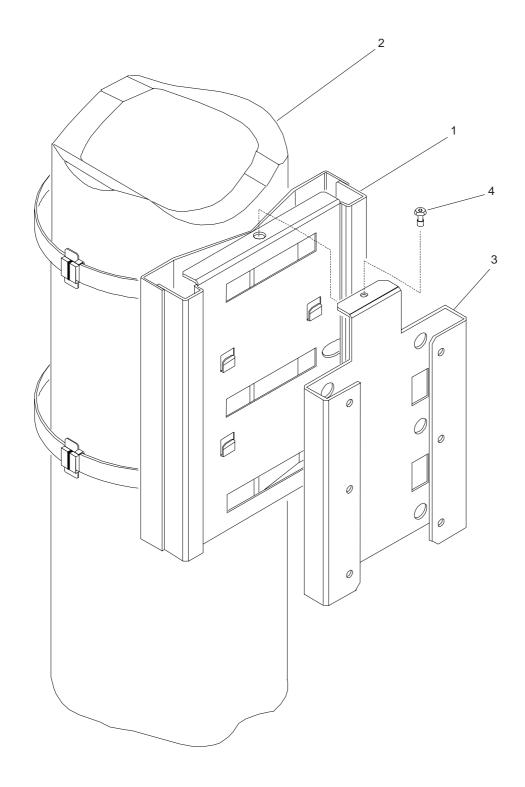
BTSE: Pole mounting frame without tilting mechanism
